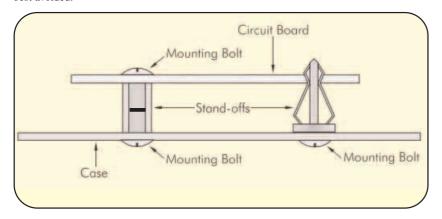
Some stand-offs use mounting bolts at both ends (left), and are effectively just threaded spacers. Another type (right) is bolted to the case and the circuit board then clips in place
